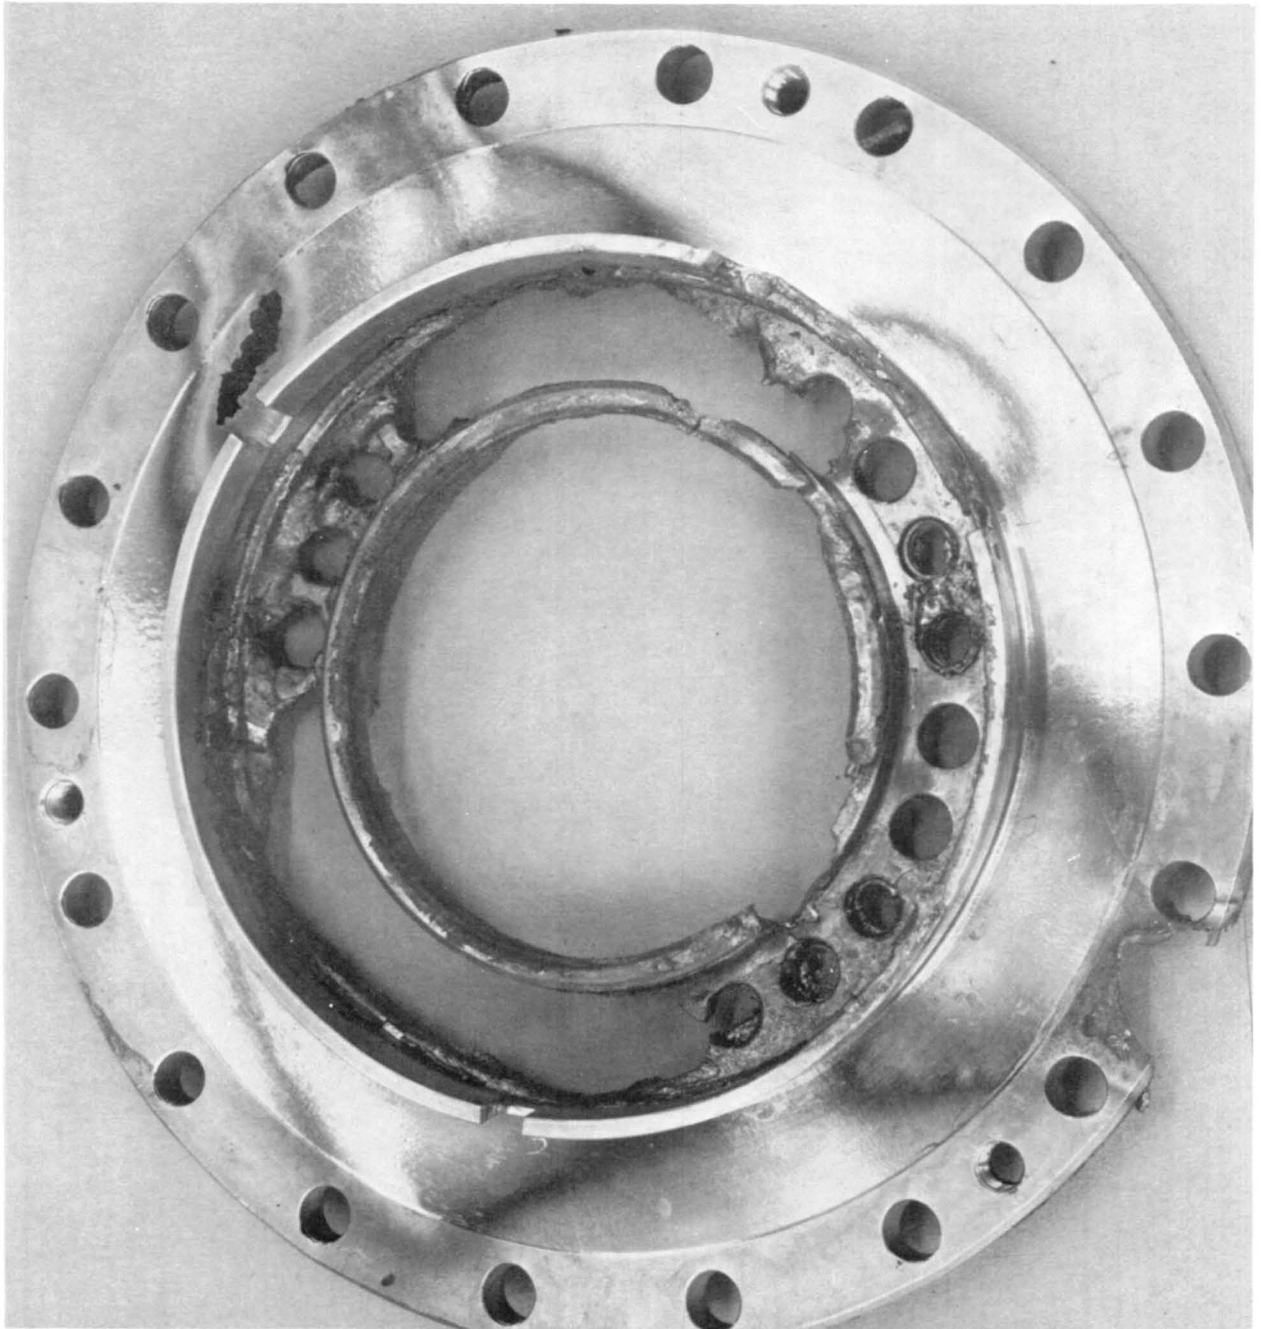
L0X Seal Housing High Pressure Side, Posttest 176
